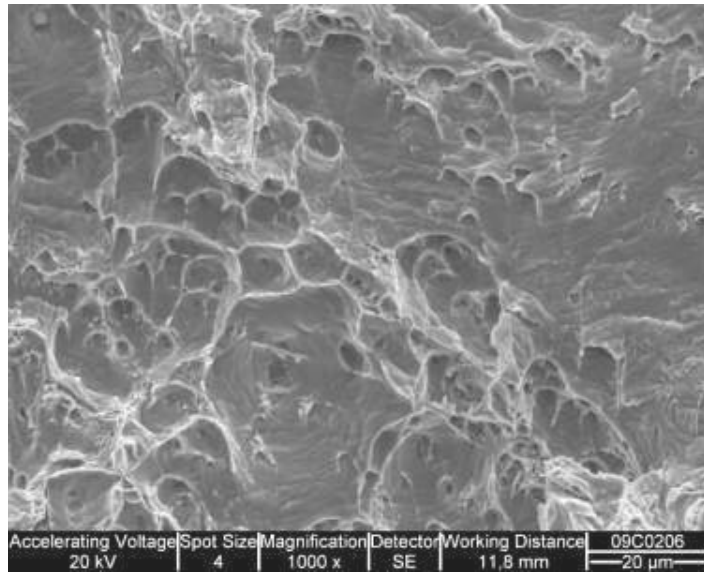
SEM image of the fracture surface of Alloy 82 showing ductile dimple fracture after a J-R test performed in air (specimen B1).
